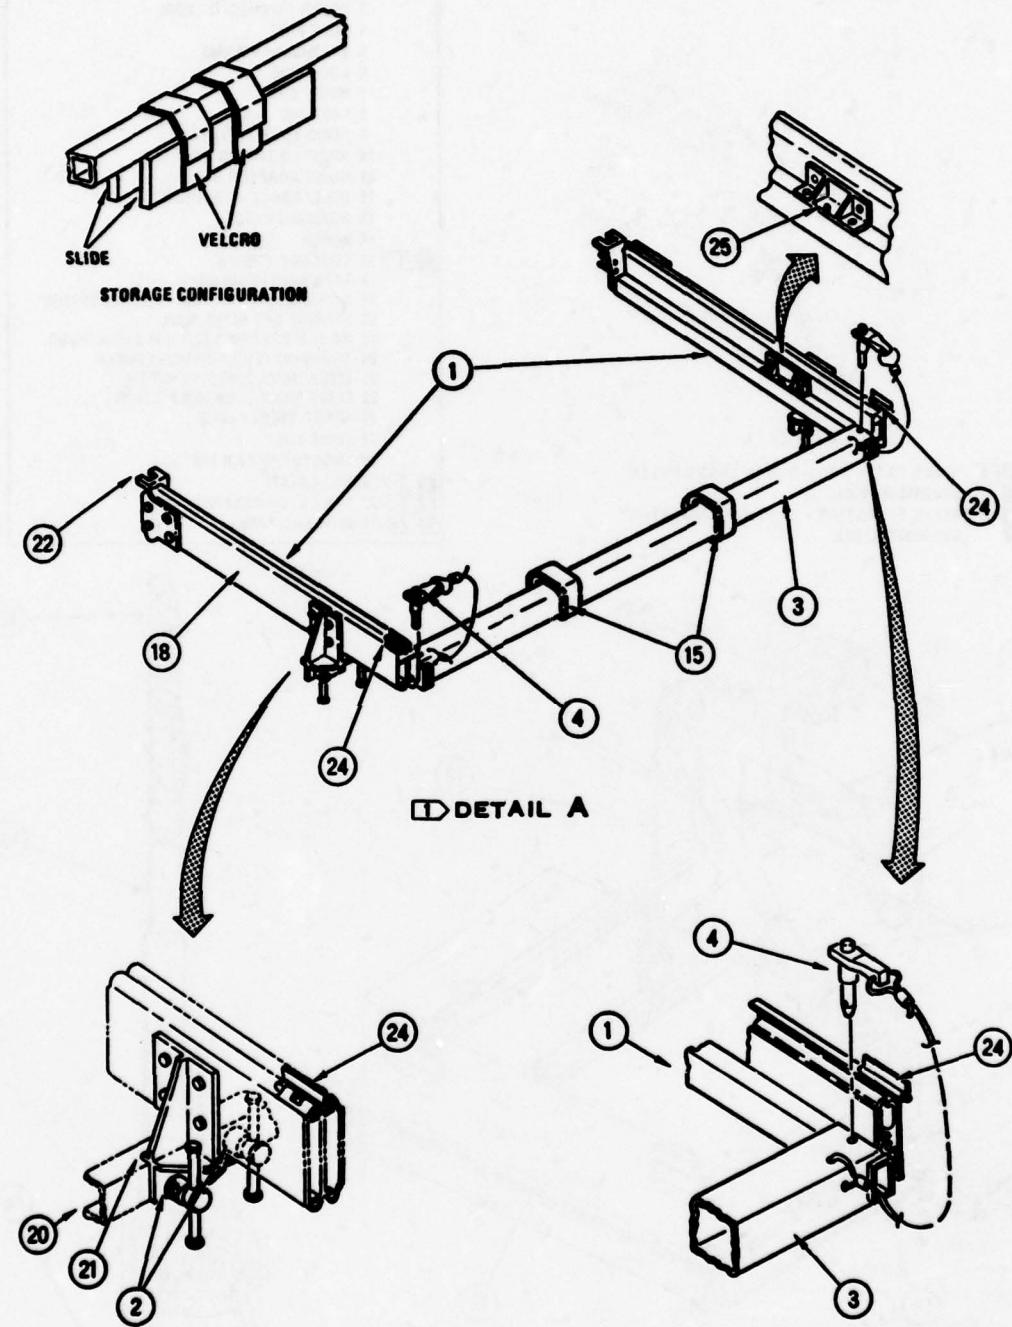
Transmitter (011) Installation and Removal Special Tools (Sheet 1 of 4)
